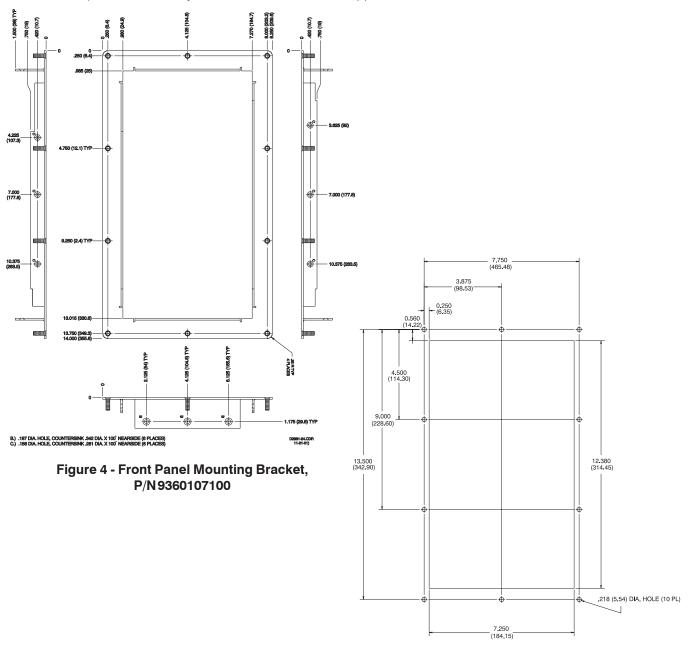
Front Panel Cutout Dimensions (Requires mounting bracket shown in Figure 4.)
